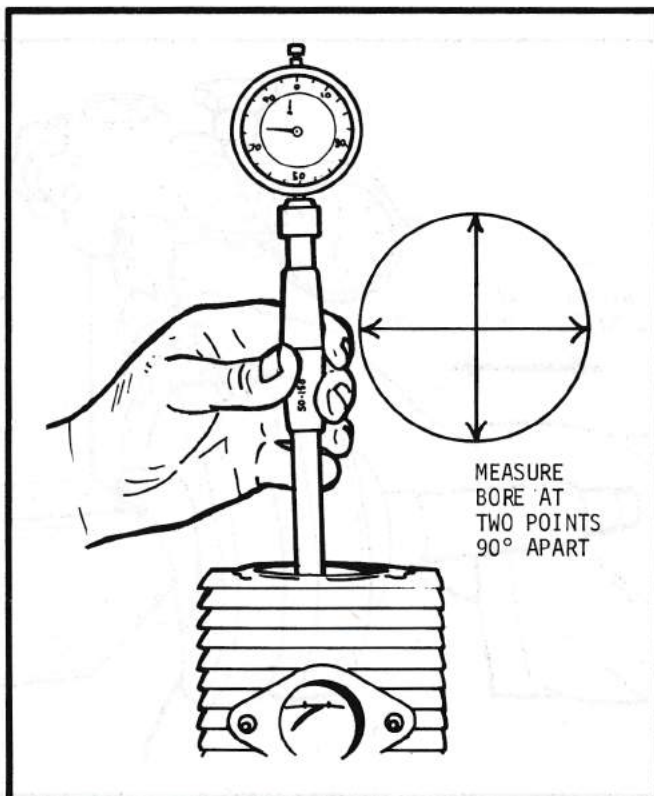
CHECKING CYLINDER BORE FOR WEAR
